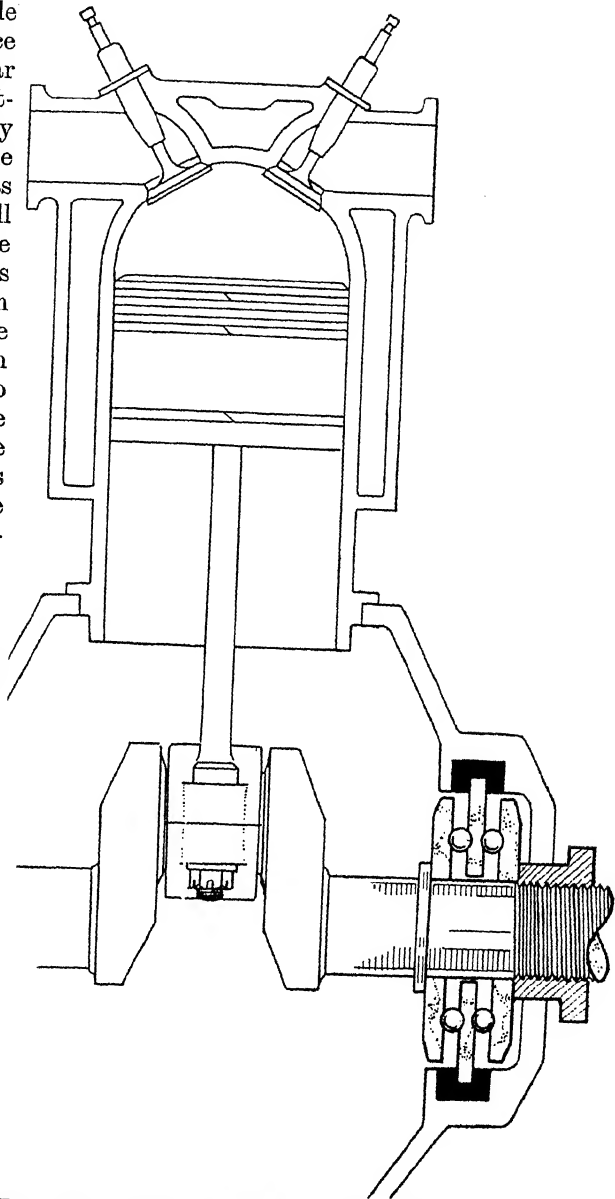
A.—CYLINDER ASSEMBLY WITH DOUBLE ROW THRUST BEARING.
